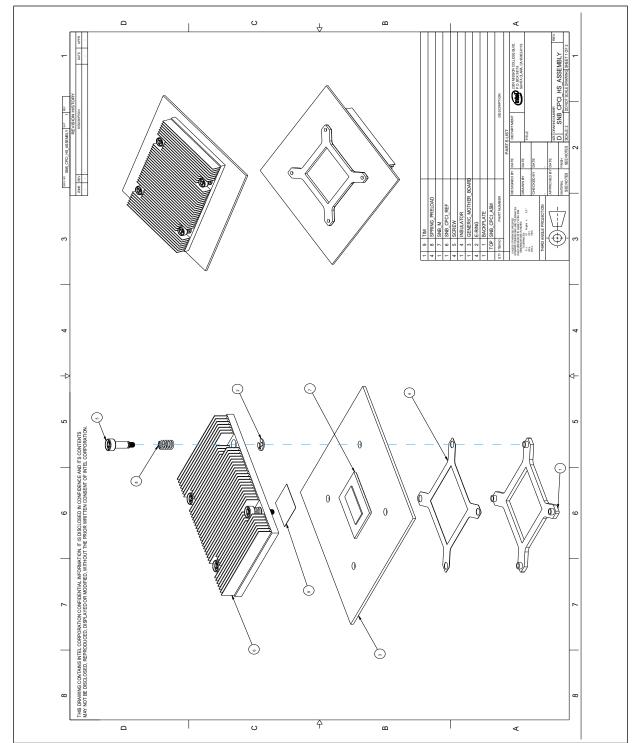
cPCI\* Reference Heatsink Assembly (Sheet 1 of 2)
